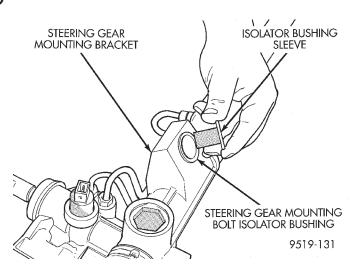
Mounting Bolt Isolator Sleeve Installation
